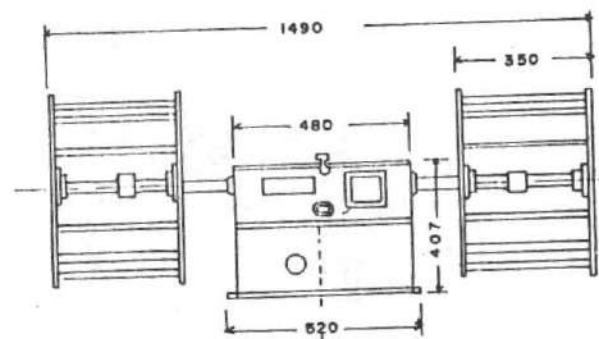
Schematic diagram of jigging machine and side view of hexagonal drum
